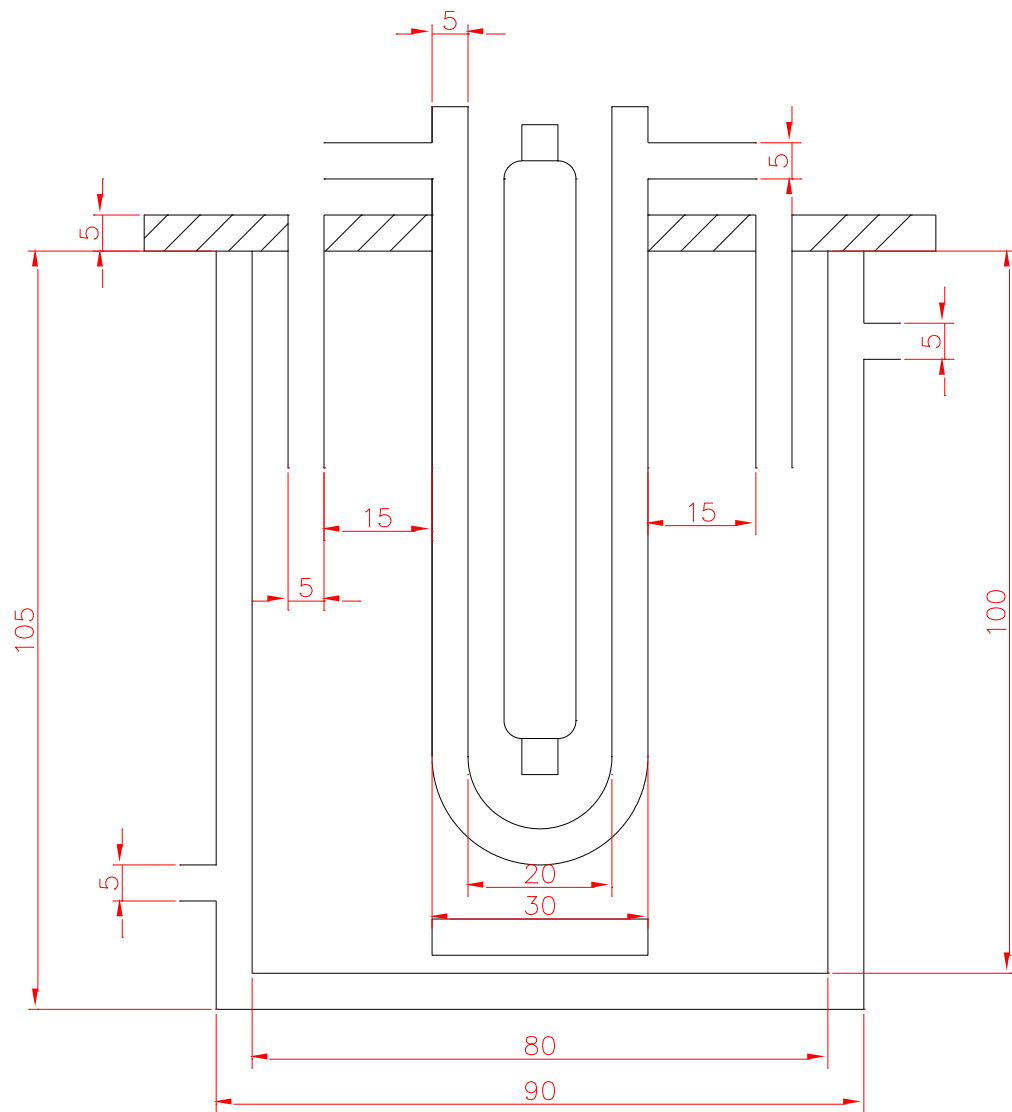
Two dimensional design of the photoreactor with rough dimensions in millimeters excluding wall thicknesses.
